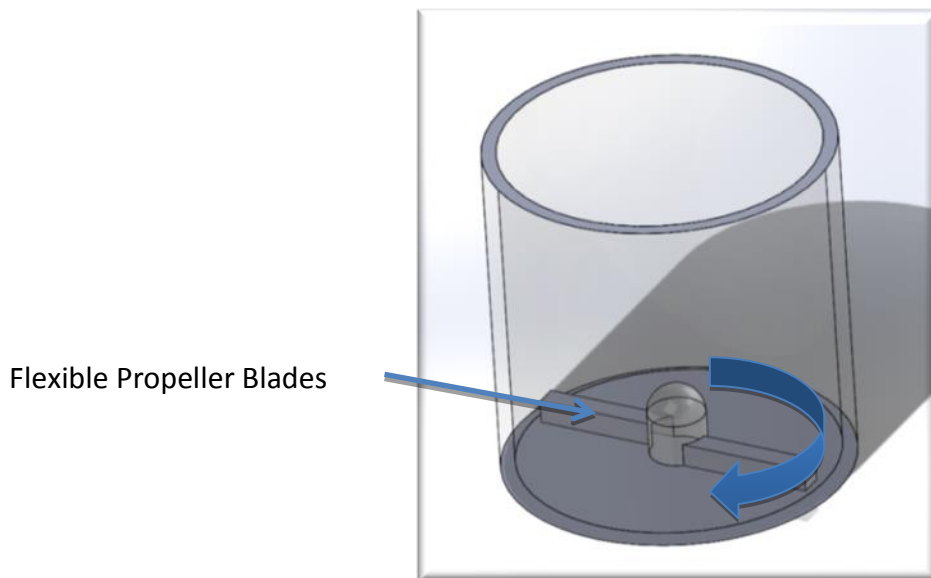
Propeller Alternative: The propeller design consists of two flexible propeller blades attached to a rotating motor which are capable of rotating clockwise or counter-clockwise. Contact with the propeller blades is the stimulus delivered to wake the mouse.
